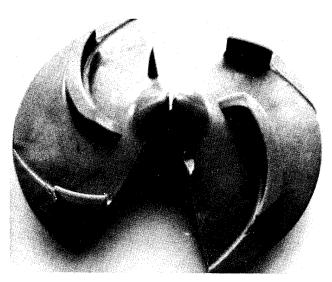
Cut away section of P.V.F., pump impeller clearly shows knurled dispersion coated metal insert. Part is gated at top of conical shape for uniform fill and minimal finishing operations.
